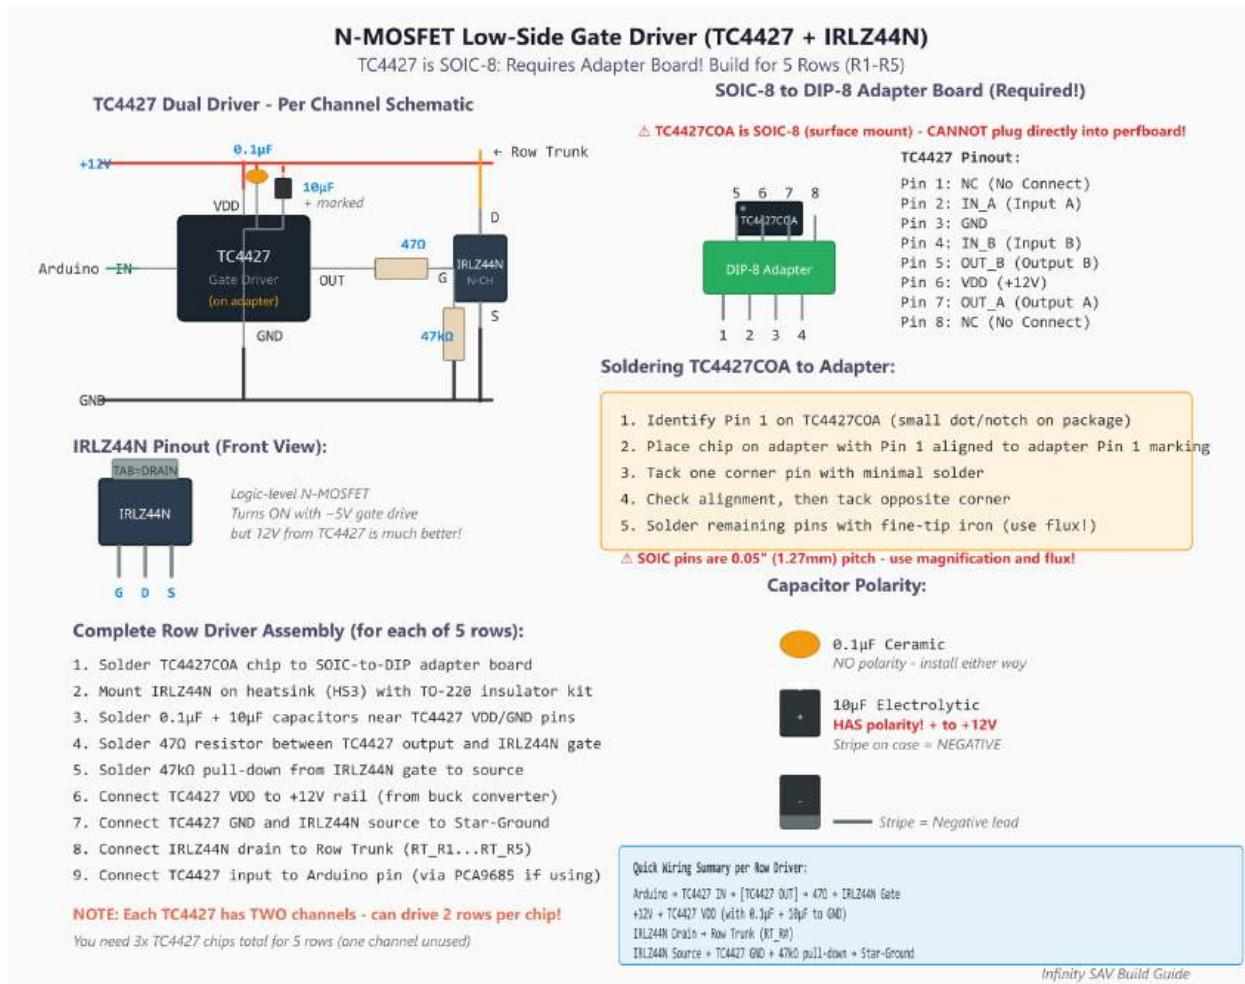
N-MOSFET & TC4427 Driver Assembly (Mounts on Heatsink HS3)
